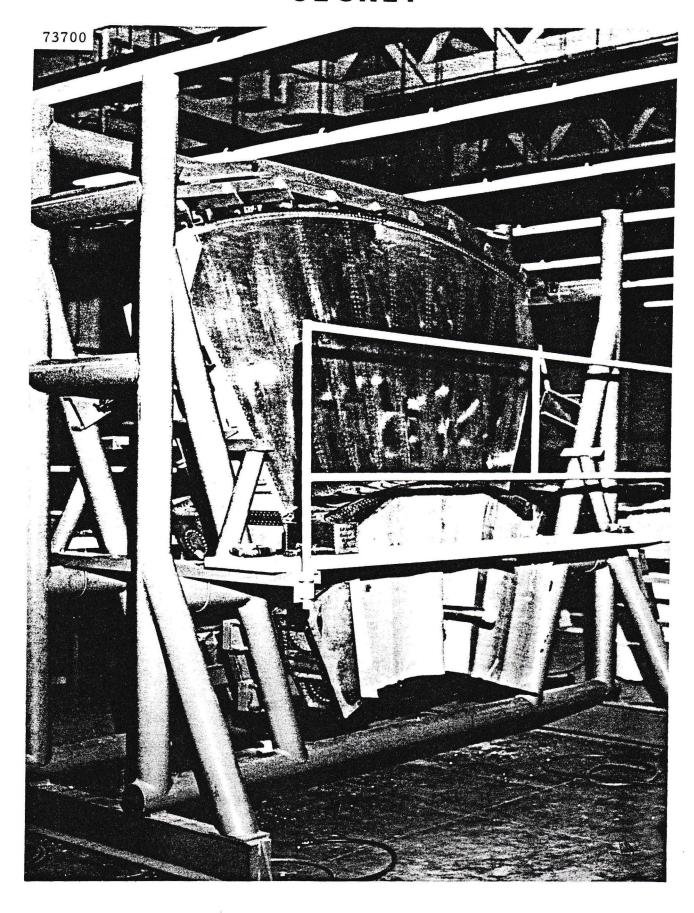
INNER WING SEGMENT ASSEMBLY IN ASSEMBLY JIG
